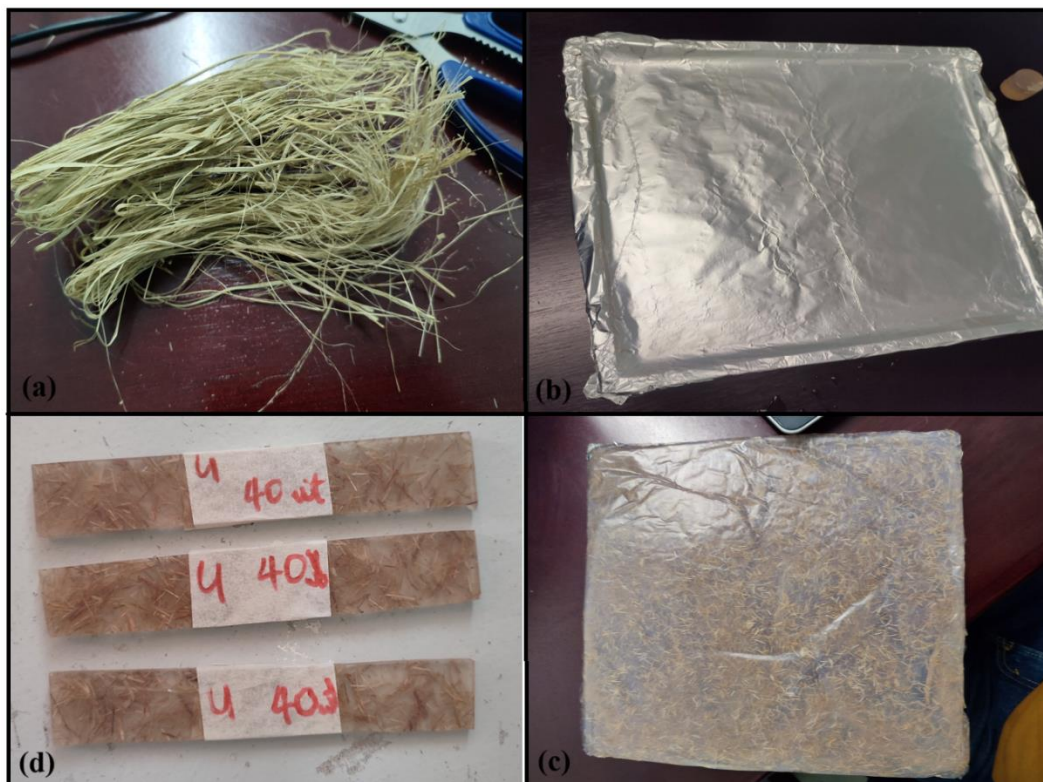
(a) Extracted Mokolwane fibre (b) Mould wrapped in Aluminium foil (c) Fabricated composite and (d) Prepared specimens for testing
